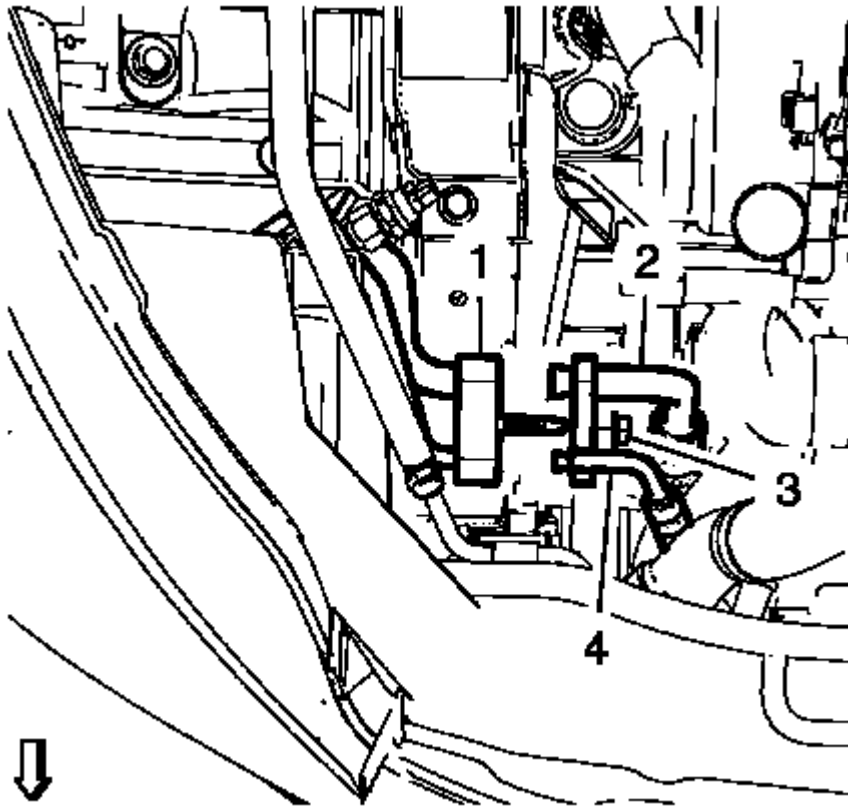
Air Conditioning Condenser And Evaporator Hose Fitting Nut
